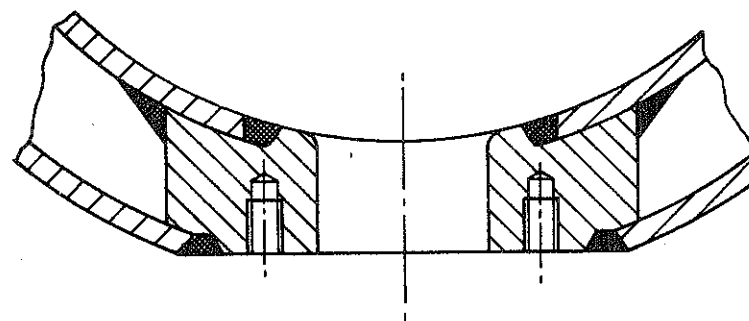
Bottom outlet in a pad welded to head and jacket
